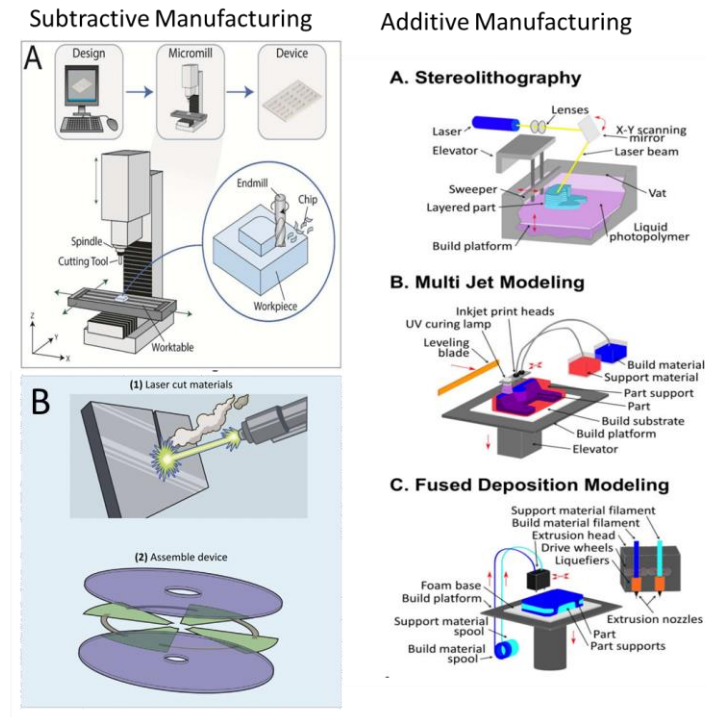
On the left schematic representation of subtractive manufacturing approach: A) representation of the basic components of a CNC milling machine (modified from [37]); B) schematic representation of the step to manufacture microfluidic device, microstructuring the substrate material using a laser (modified from [45]). On the right schematic representation of 3D printers used in additive manufacturing. A)
